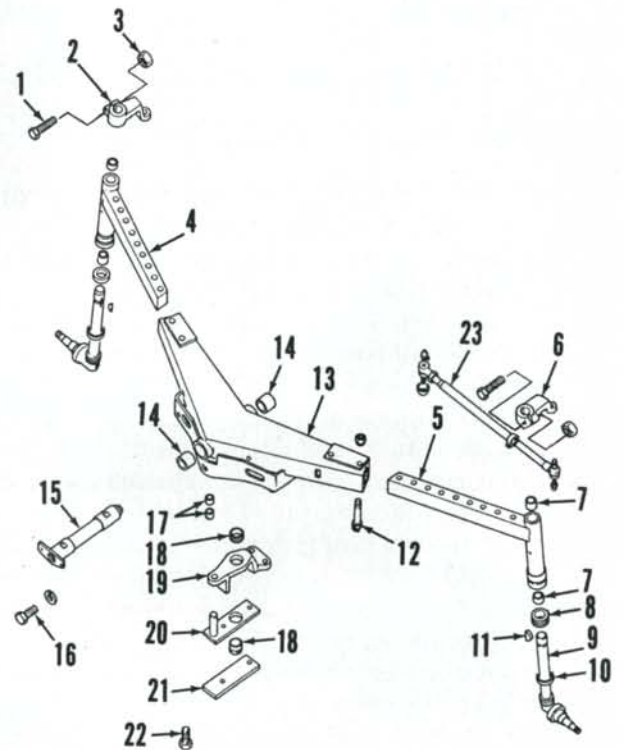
Exploded view of swept back adjustable front axle used on some tractors. Refer to Fig. 1 for legend except for tie rod assembly (23).
